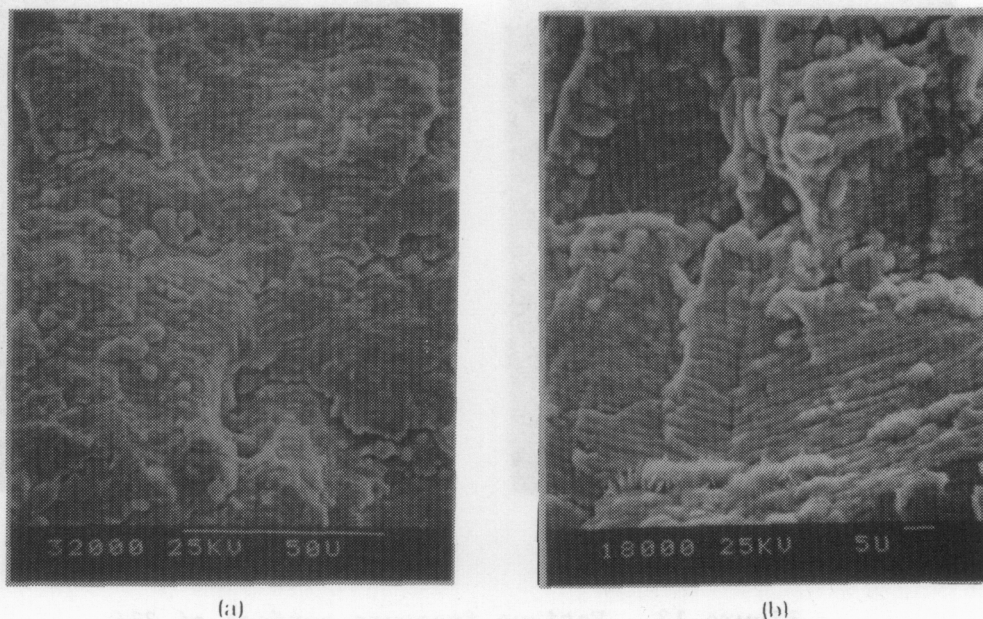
Fatigue fracture surface of 316 Stainless Steel isothermally cycled at 649°C: (a) crack length = 1.33 mm; (b) crack length = 1.97 mm.
